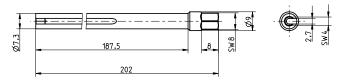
Mounting wrench ø7,3 mm, slotted, Type 1300B14Q01
